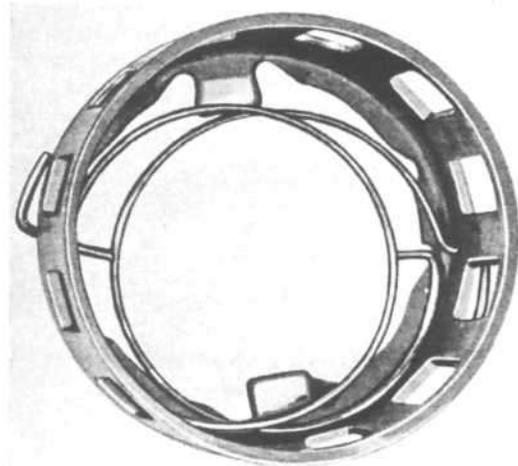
FREEWHEELING CAM RETAINER WITH SPRINGS ASSEMBLED
